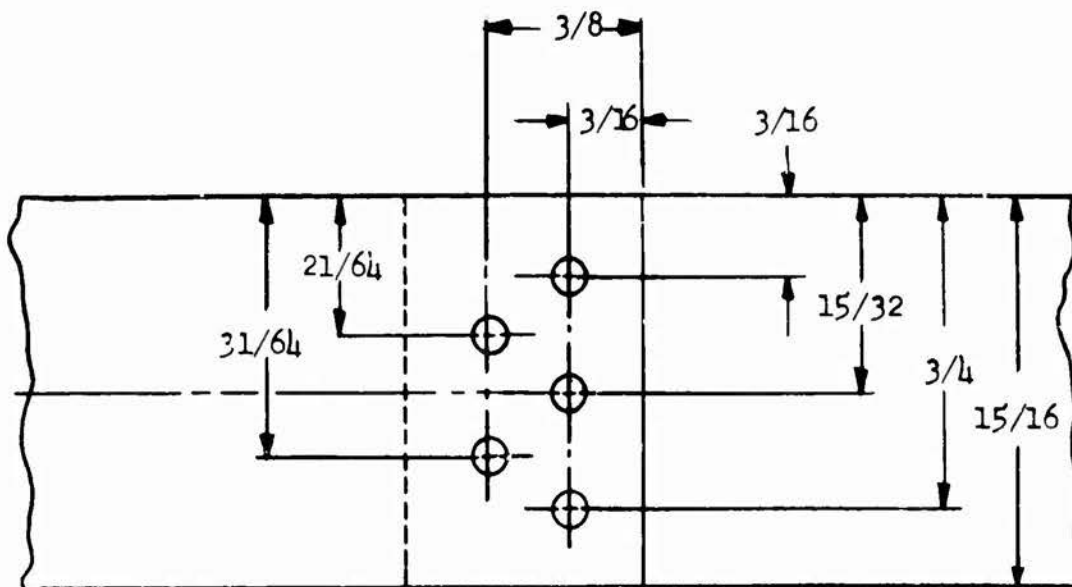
Typical Riveted Joint Pattern for Fatigue Test Specimen. (All dimensions shown are in inches.)
